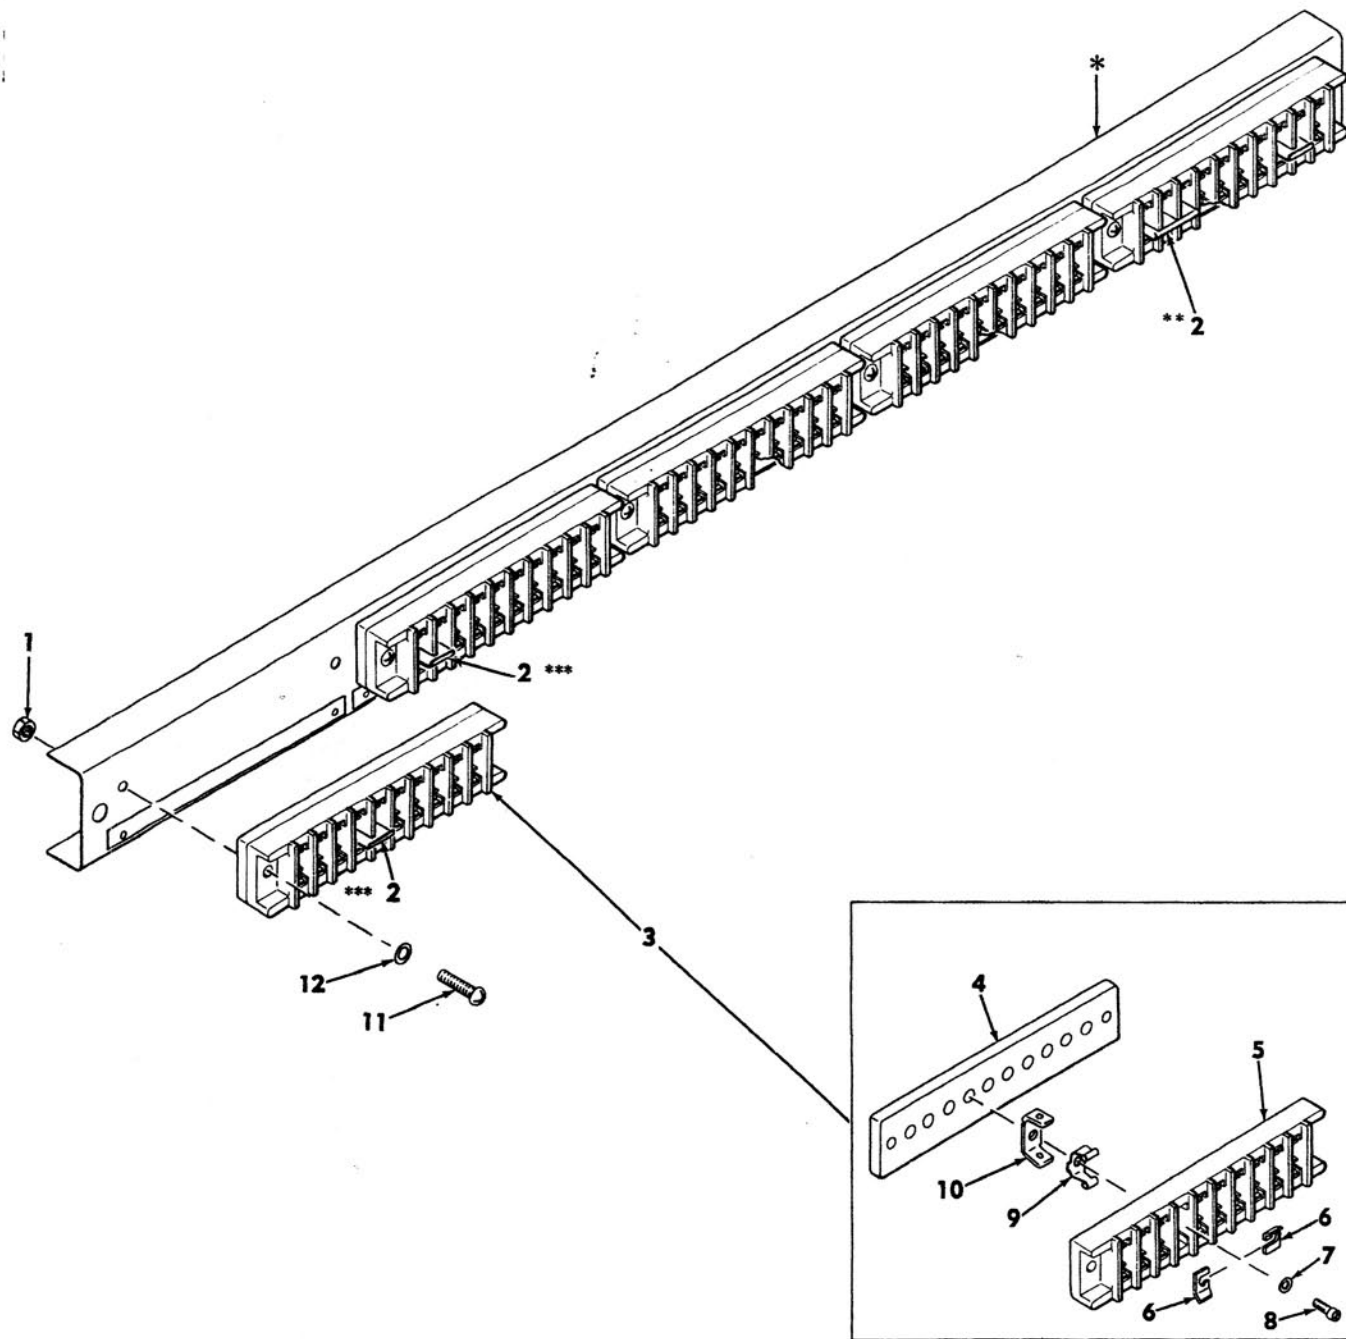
CONNECTOR, PLUG, ELECTRICAL ASSEMBLY /11067515/
